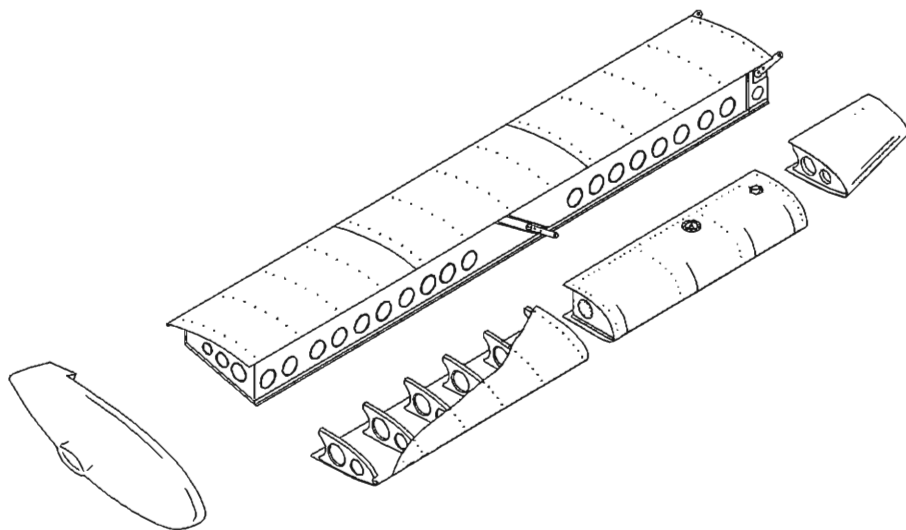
RIGHT HALF-WING EXPLODED VIEW
